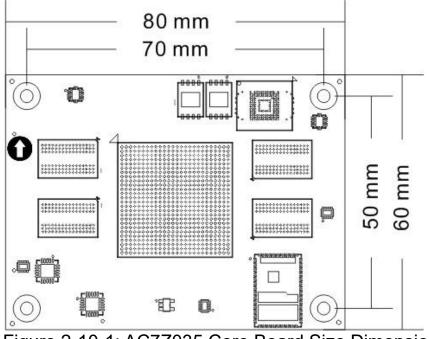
AC7Z035 Core Board Size Dimension
